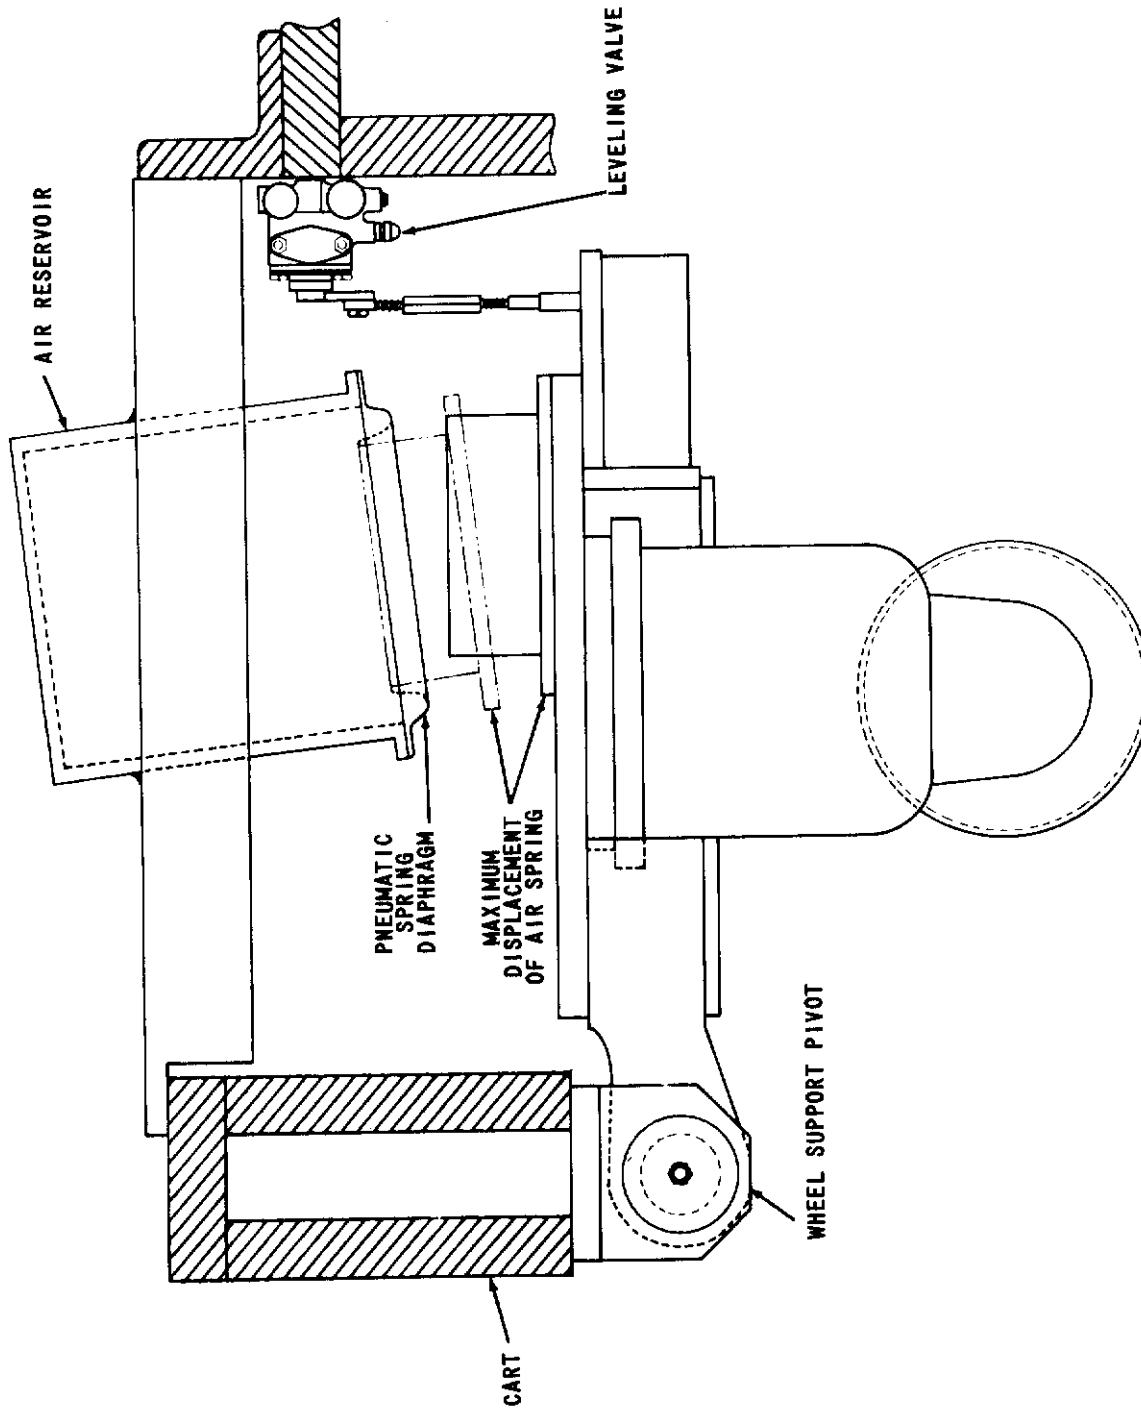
THE PNEUMATIC SUSPENSION SYSTEM - RIGHT FORWARD WHEEL ASSEMBLY
